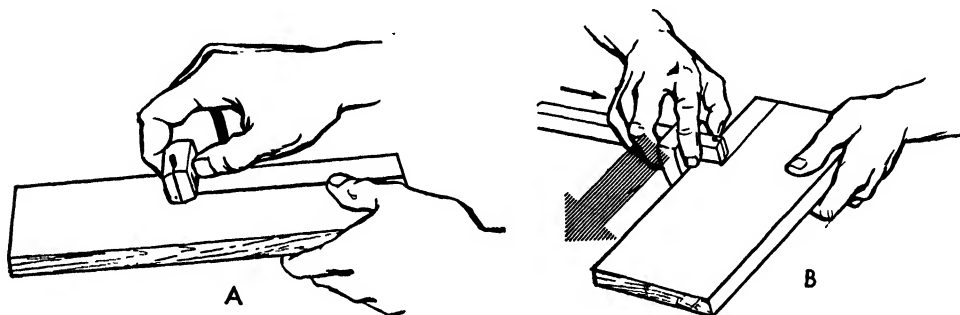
Using the marking gage. Be sure to hold the head of the gage firmly against the edge of the board and to roll the beam slightly forward so that the spur drags at a slight angle.
